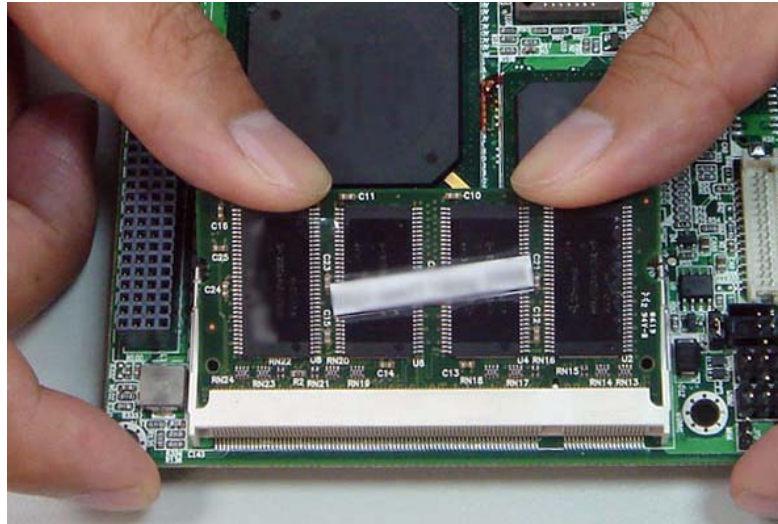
Fully insert the SO-DIMM Memory Module into the onboard socket
